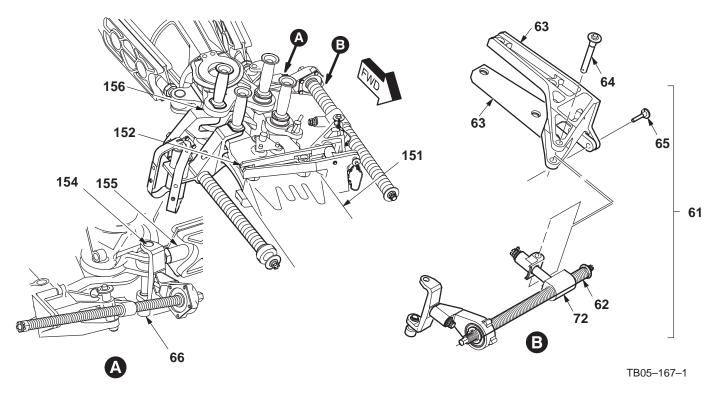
Removal of Blade Positioner from L/H FWD Blade
